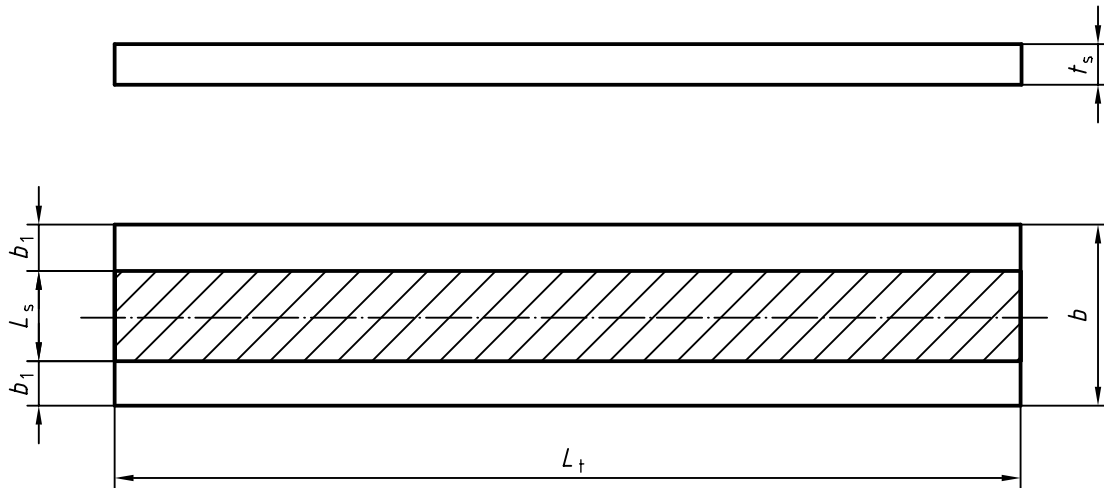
Transverse side bend test specimen for a butt weld (SBB)
